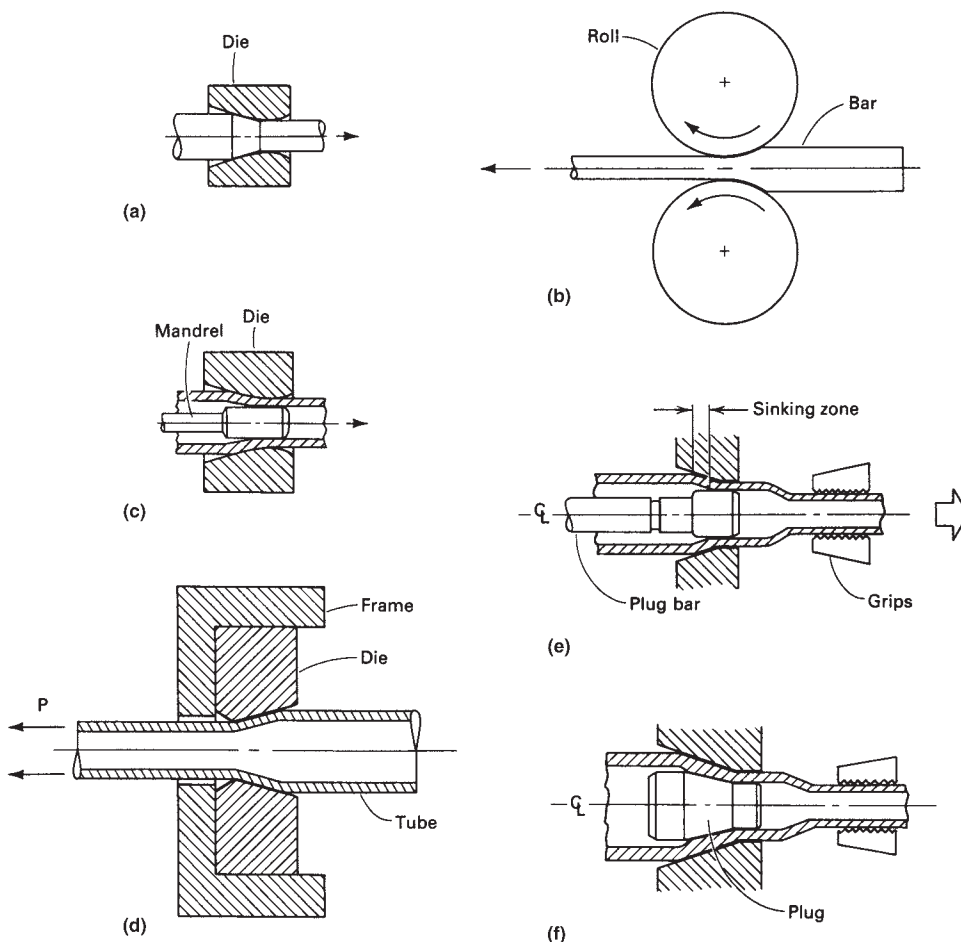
Schematic examples of some drawing methods: (a) wire drawing, (b) bar drawing with undriven rolls, (c), (d), (e), and (f) tube drawing. View (d) shows drawing without any mandrel, (e) with fixed plug, and (f) with floating plug if a fixed plug will stretch or break. Source: ASM 1988d
